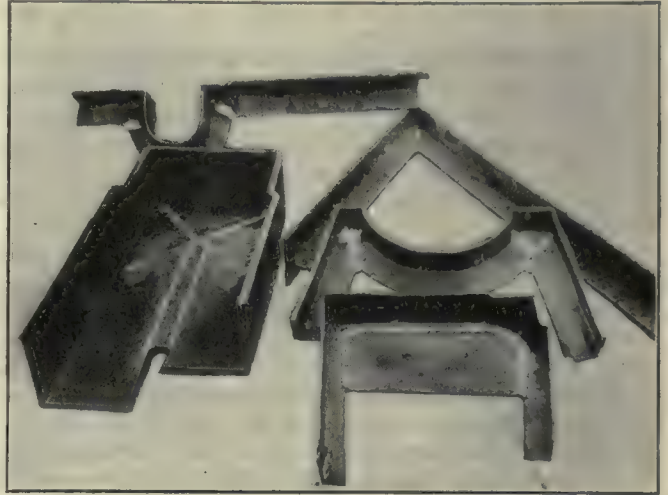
WELDED PARTS FOR SHIPS
